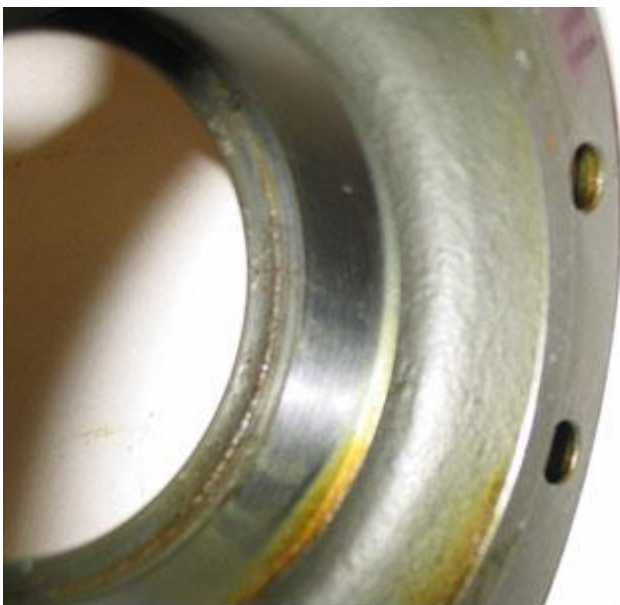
Oil seal housing machined from the inside face to accept a modern seal
